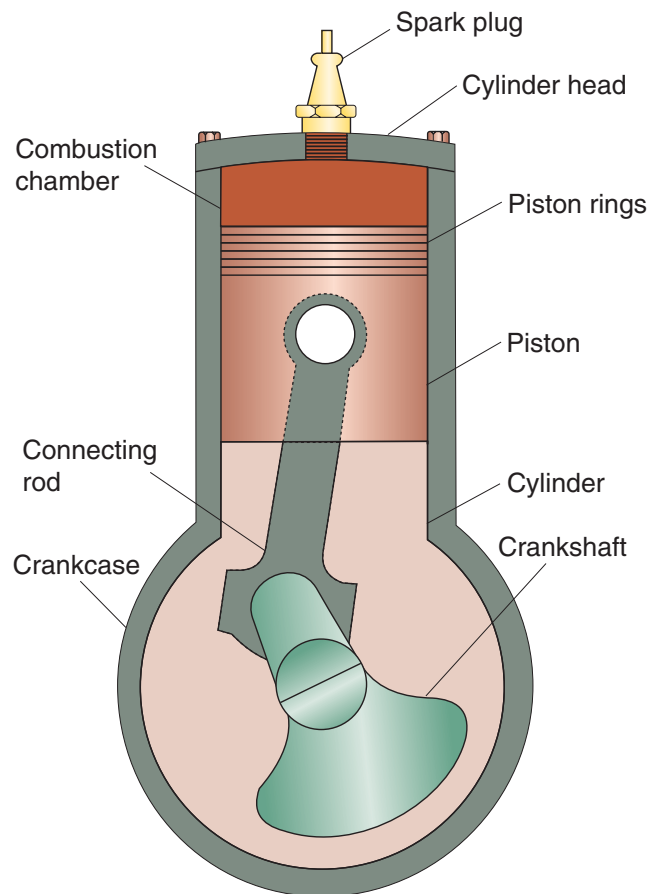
A simplified cutaway view of an engine. During operation, the piston moves up and down inside the cylinder. This movement is transferred to the crankshaft through the connecting rod.
